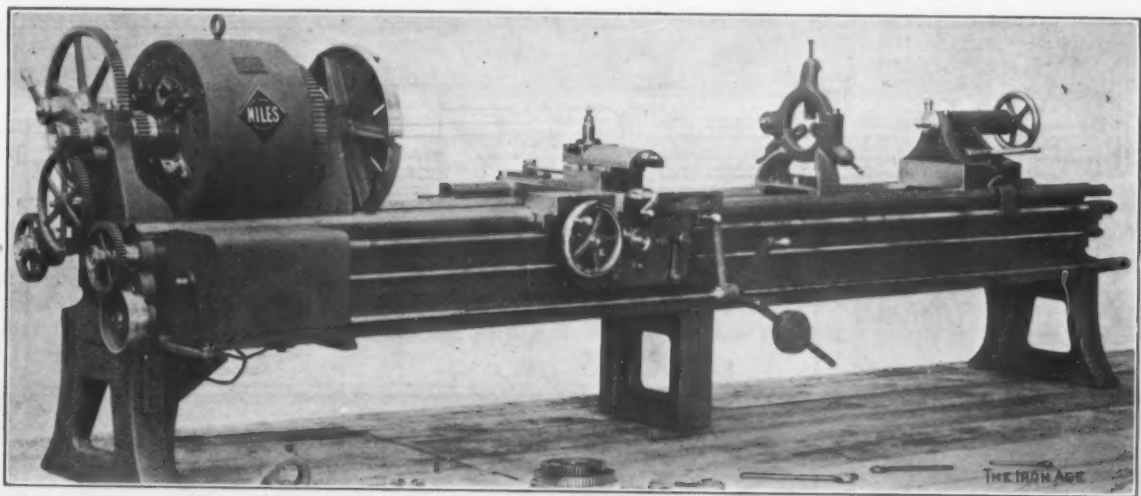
An Electrically Operated 22-Inch Engine Lathe Built by the Niles Tool Works of the Niles-Bement-Pond Company.
